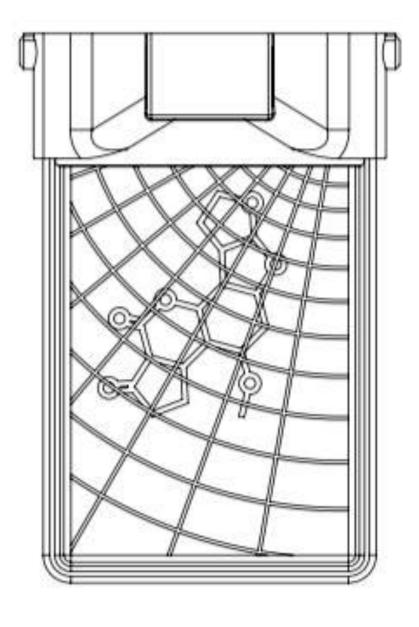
Mobile Assay Inc. 3D print Manufacturing of mobile device illumination chamber and cases for Aflatoxin testing in Africa and Haiti.
